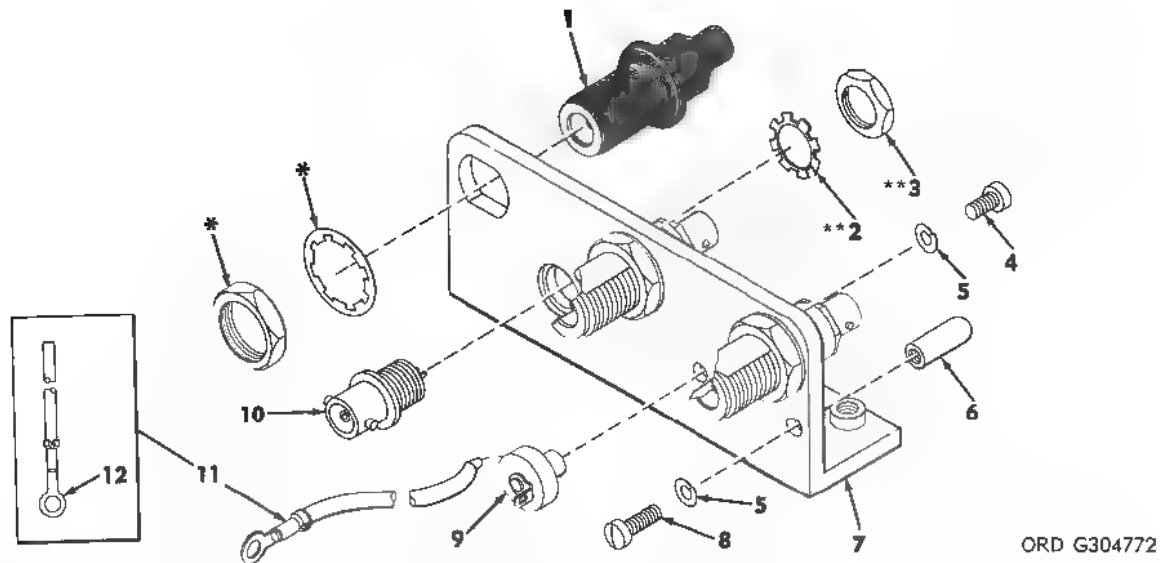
CHASSIS /9008013/-EXPLODED VIEW
